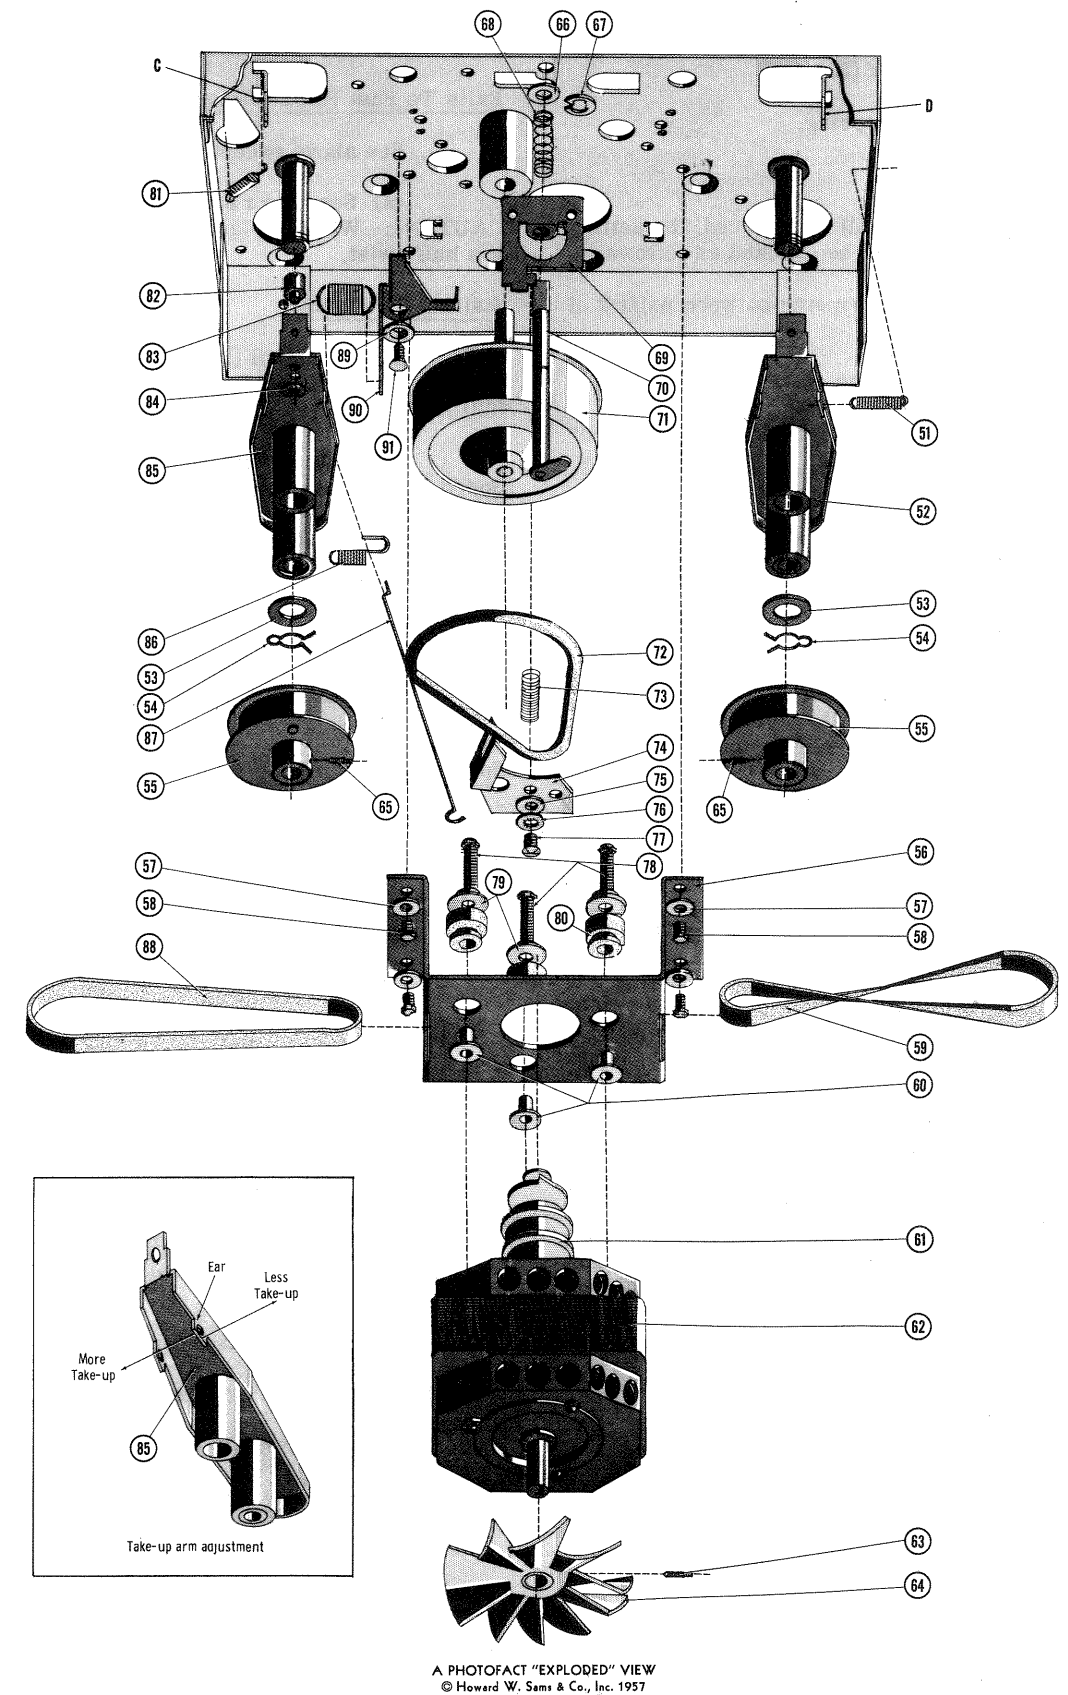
B. EXPLODED VIEW OF PARTS BELOW BASEPLATE.
